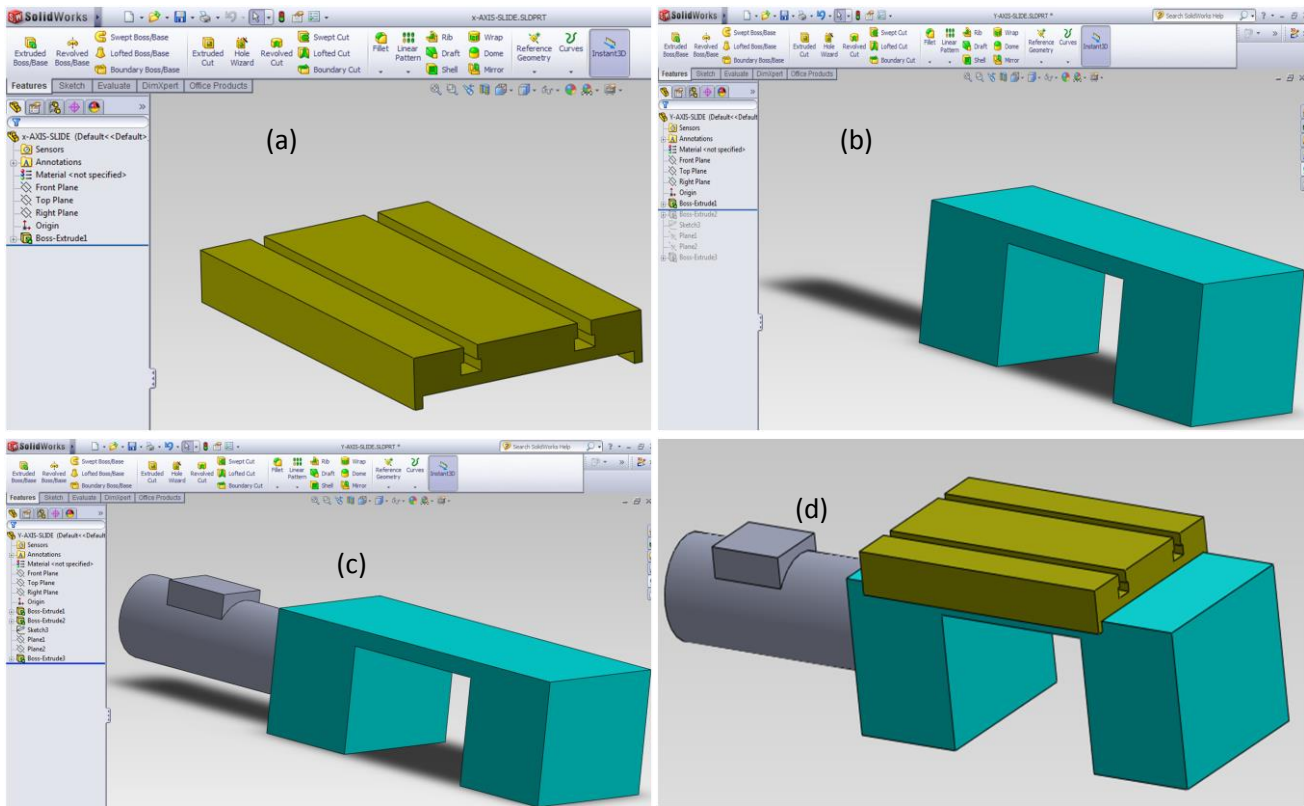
Modeling machine slides (X and Y) and its sub-assembly.
